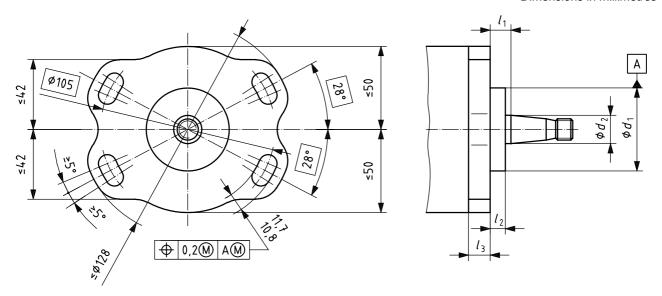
Fuel injection pumps — Type 3 end-mounting flange (standards.iteh.ai)
